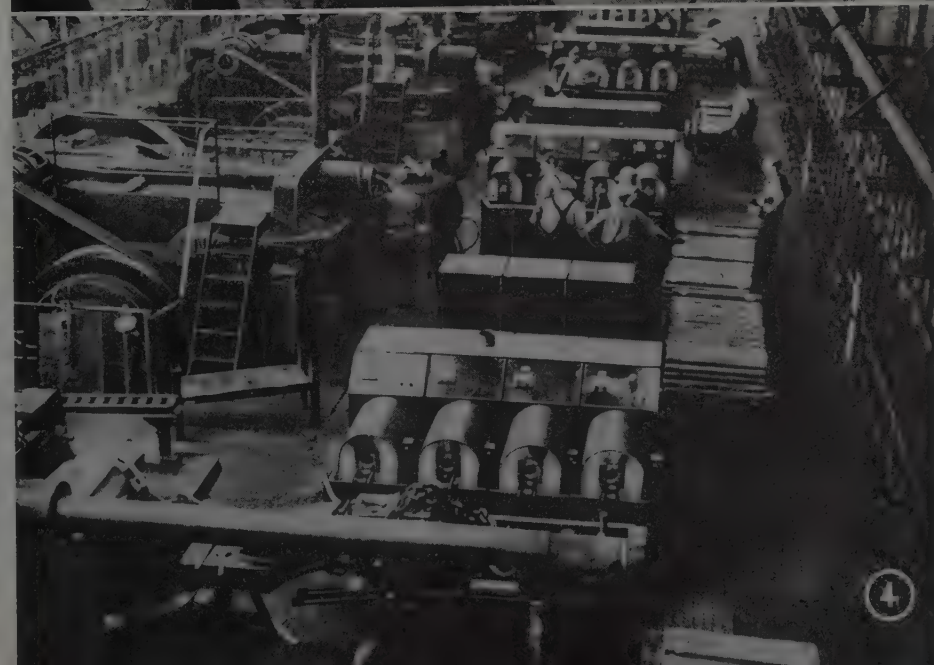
Each forging machine in this large installation (only part of which is shown here) is served by seven Ajax-Northrup heaters: Forging operation takes 30 sec and a heated bar is ready every 34 sec
